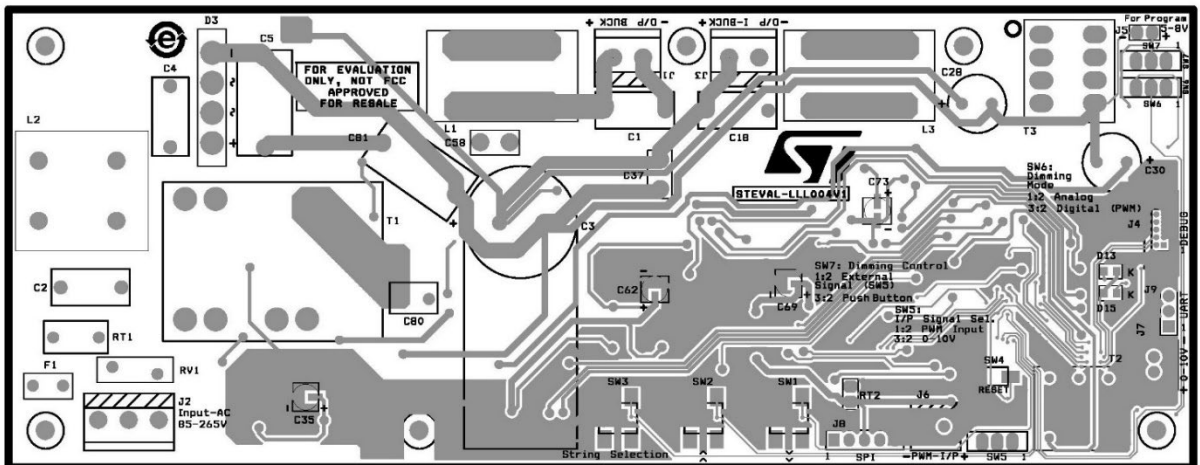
STEVAL-LLL004V1 layout bottom layer silk screen and drill
